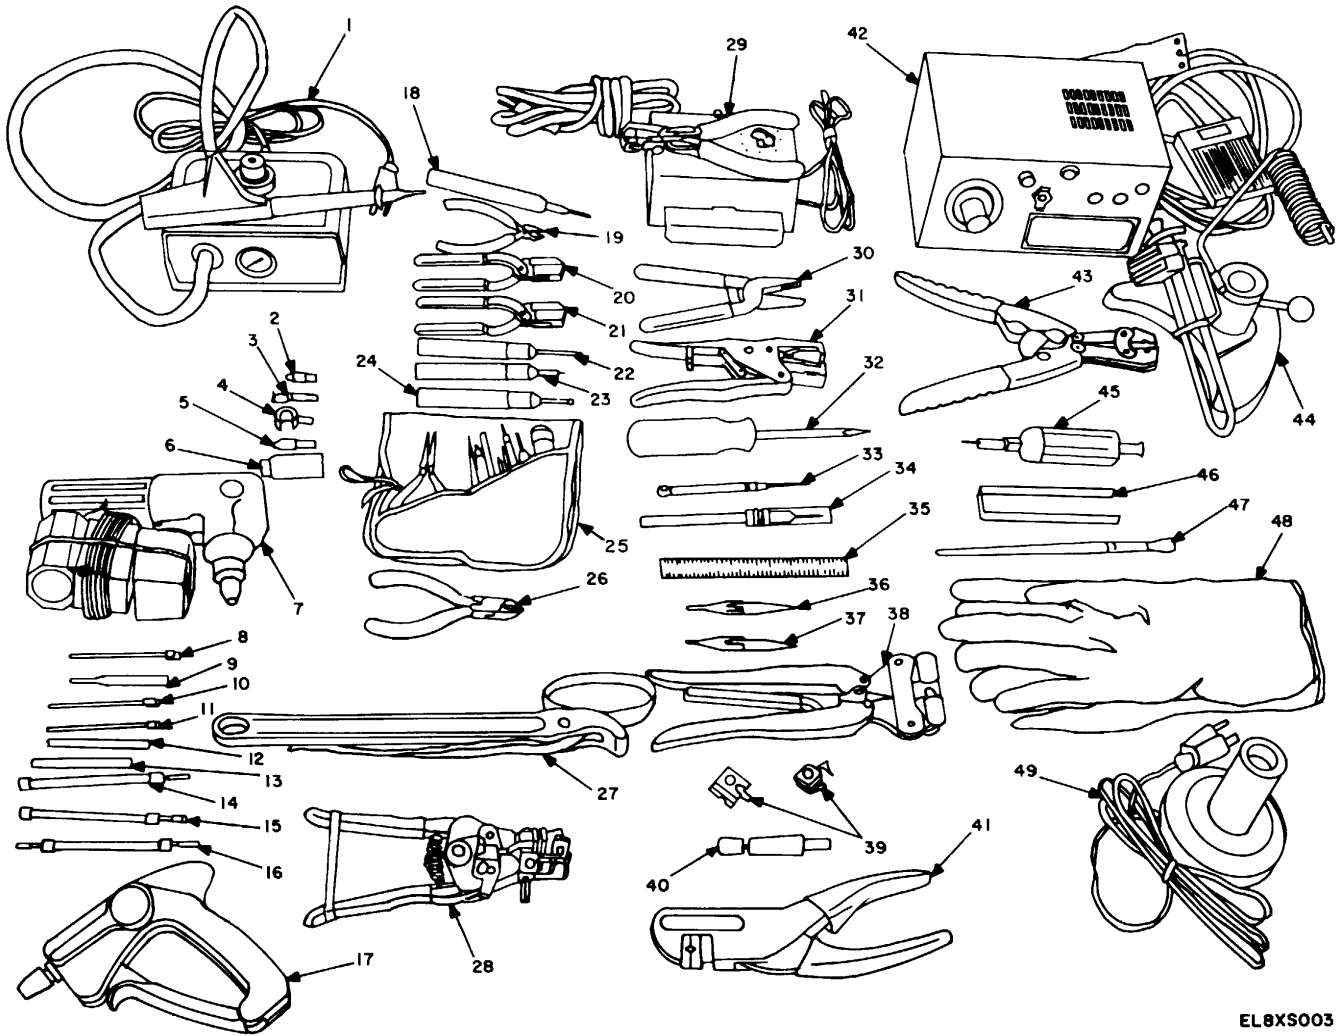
Tool kit, IL SM-A-814891 (Sheet 2 of 2).
